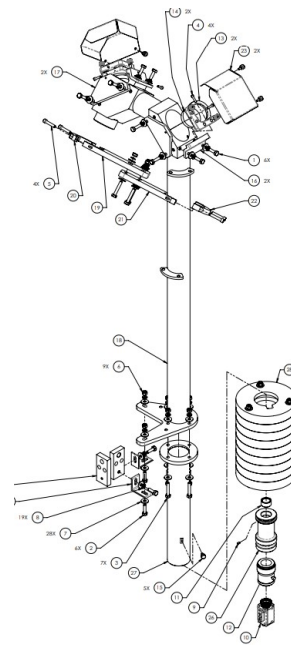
Exploded view of the CCS optical line. The camera itself is shown in the lower-right, and is surrounded by rings of cast iron or borated polyethylene.
